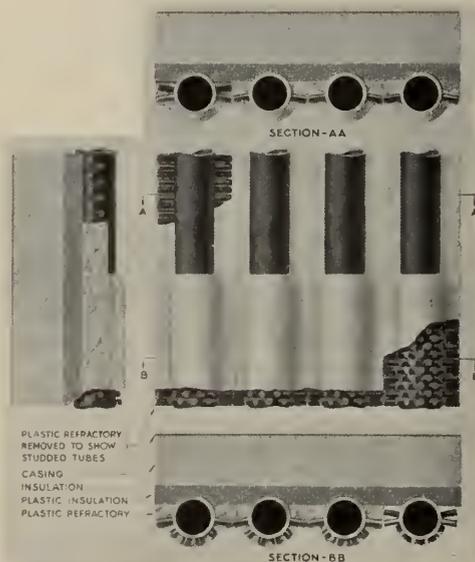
B-W Bailey Stud-Tube Furnace Wall.
